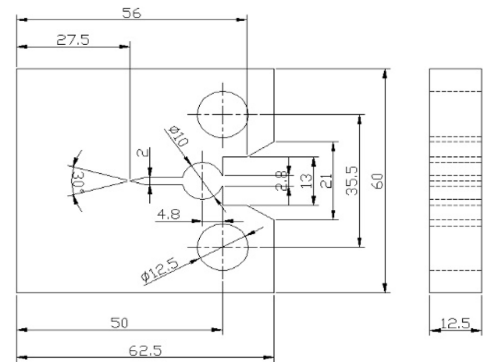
Specimen configuration for fatigue crack growth test
